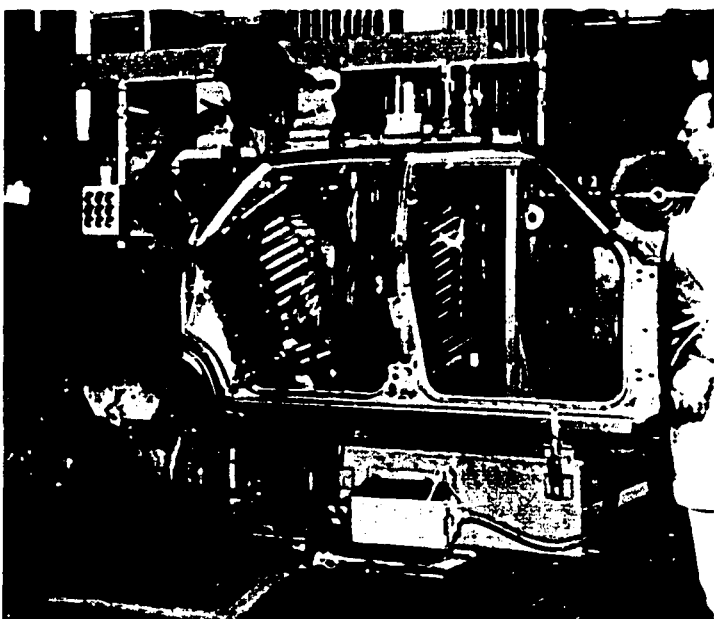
Parts of this automobile body are being fused by resistance welding.
